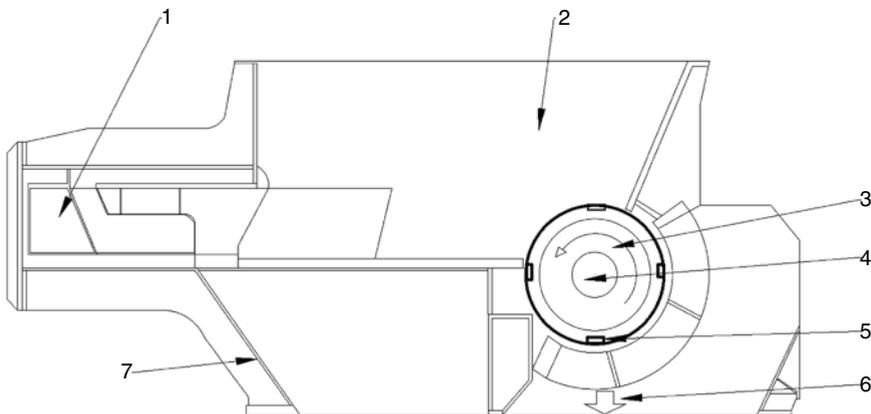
Single-shaft shredder. 1 – Pushing mechanism; 2 – feed hopper; 3 – cutter shaft mechanism; 4 – drive system; 5 – screen mechanism; 6 – discharge hopper; 7 – the frame body.
